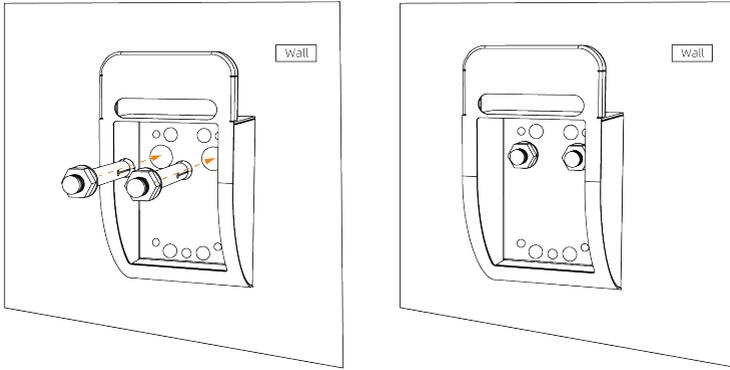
mounting diagram of expansion screw of charging connector placement assembly1
